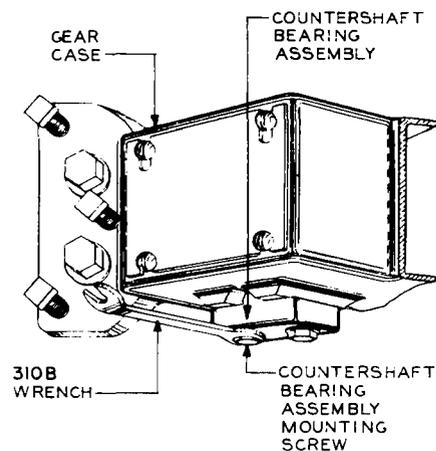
Method of Removing Countershaft Bearing Assembly
